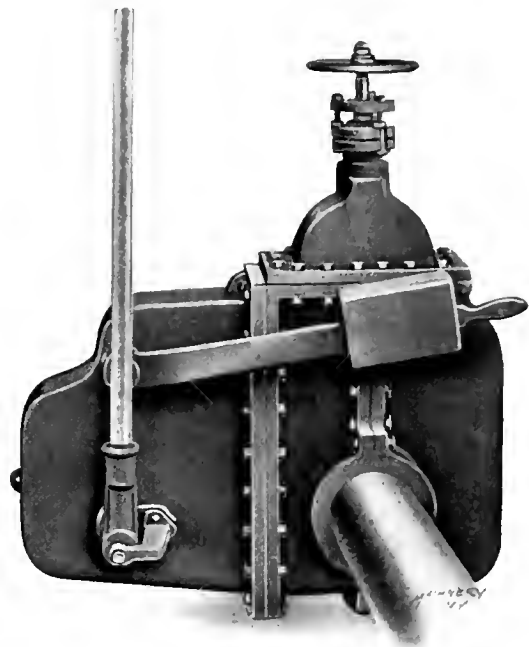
Sawing Arrangement Clamped in Place, ready to begin Cut.
